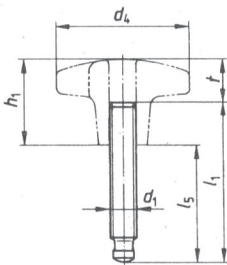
Clamping screw with DIN 6335 star handle or DIN 6336 machine knob
